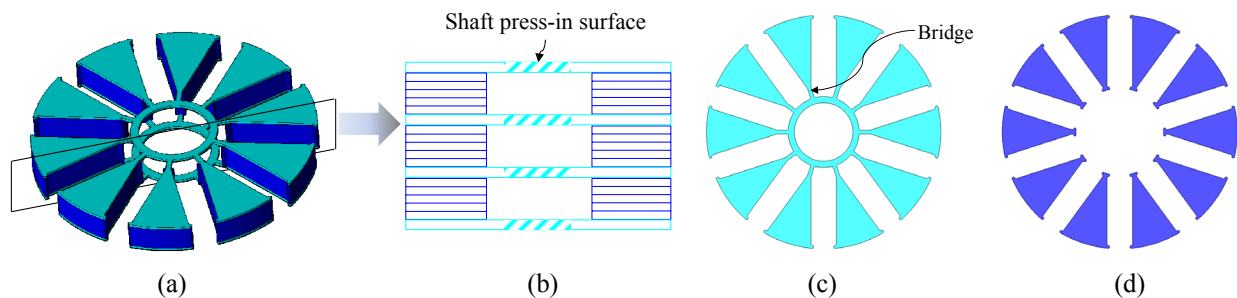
Shape of cross-laminated rotor core and assembly structure. (a) Rotor core assembly (b) Cross section view of the core assembly (c) Rotor core with bridge (d) Rotor core without bridge
